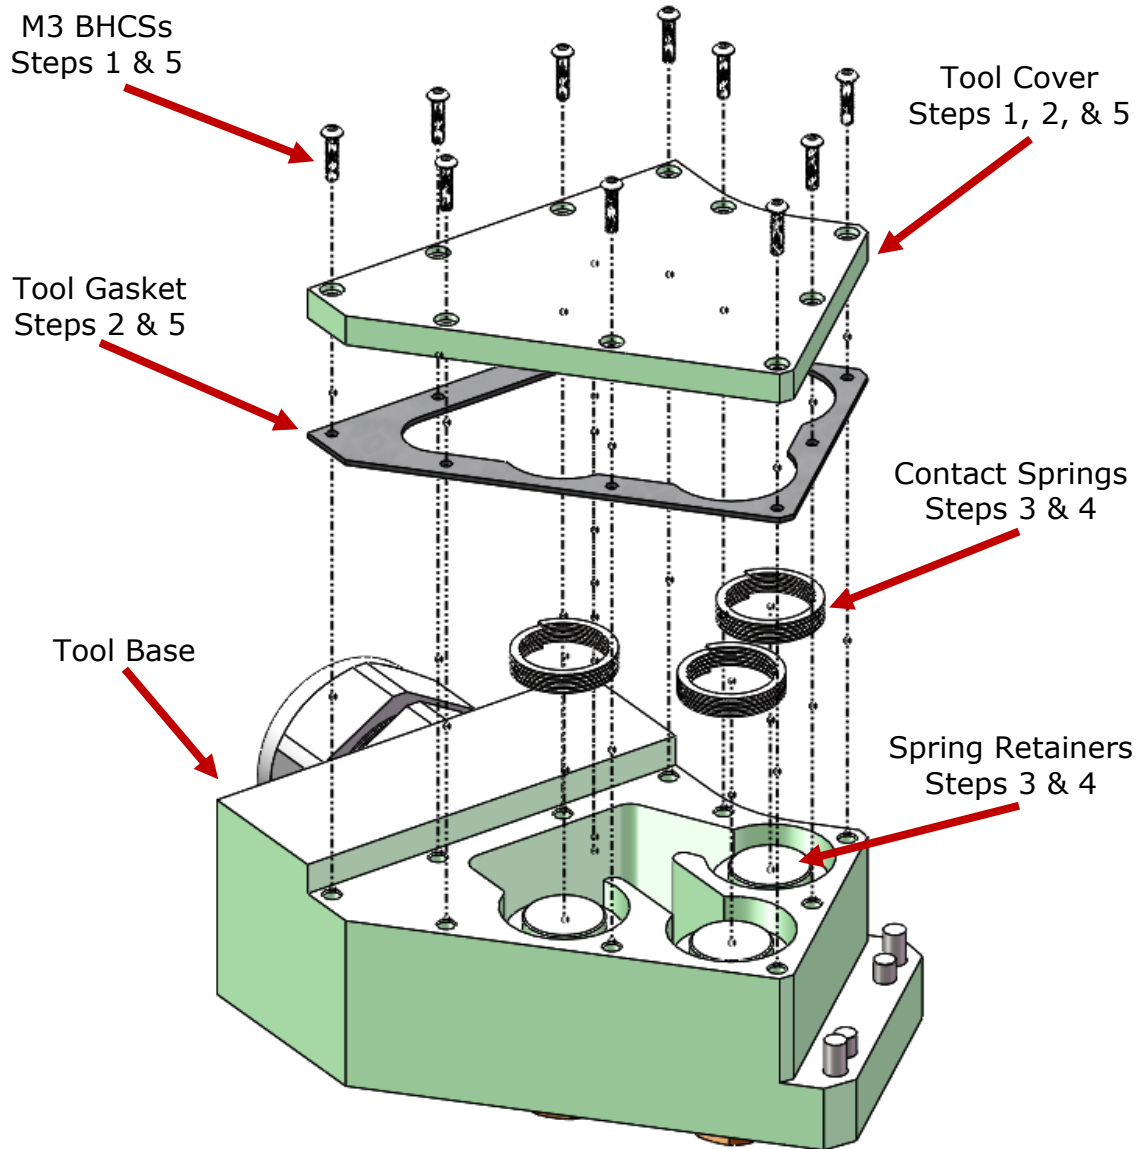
Contact Spring Replacement (Tool Side)
